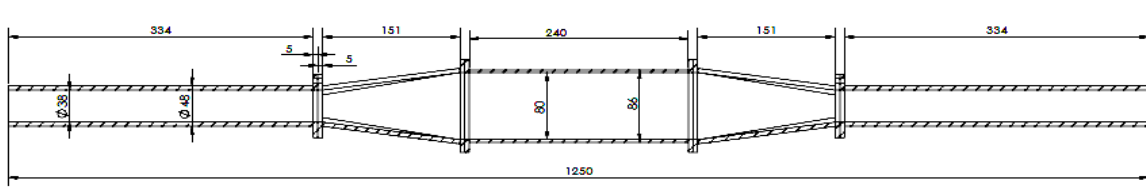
Schematic layout of exhaust heat exchanger (test section 80 × 80 × 240 mm) (B-type).
